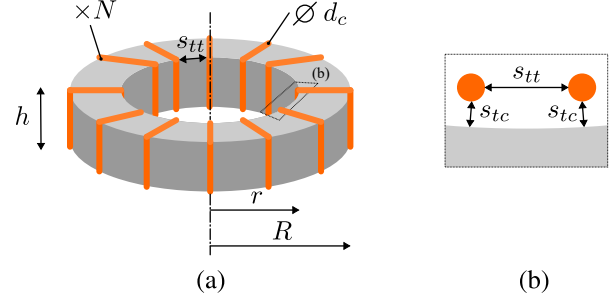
Drawings of the ring core: (a) overview and (b) close-up on a pair of turns on the inner diameter.
